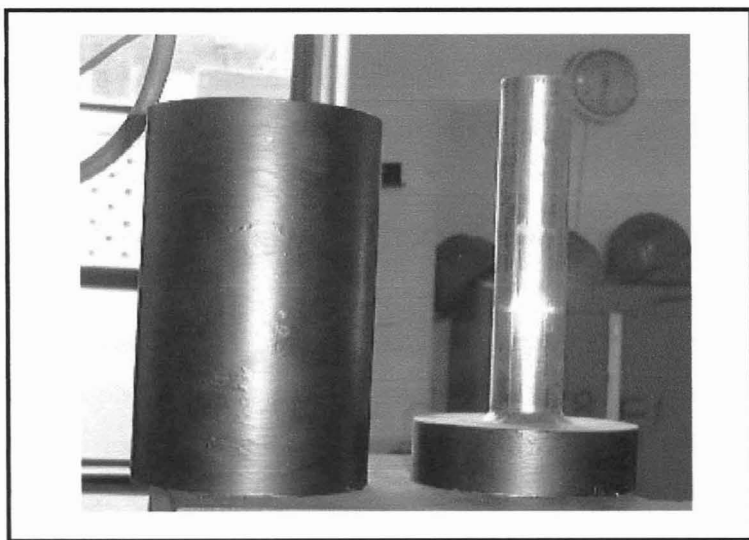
Photo of die and piston used to form cylindrical bagasse pellets
